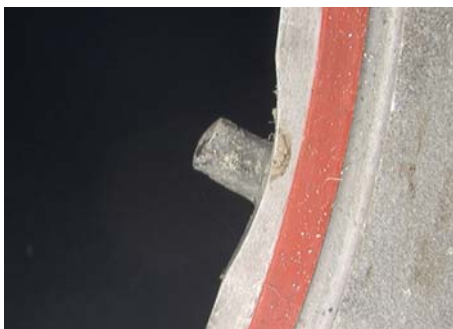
Detail of forward/lower hinge pin bushing in hole.
